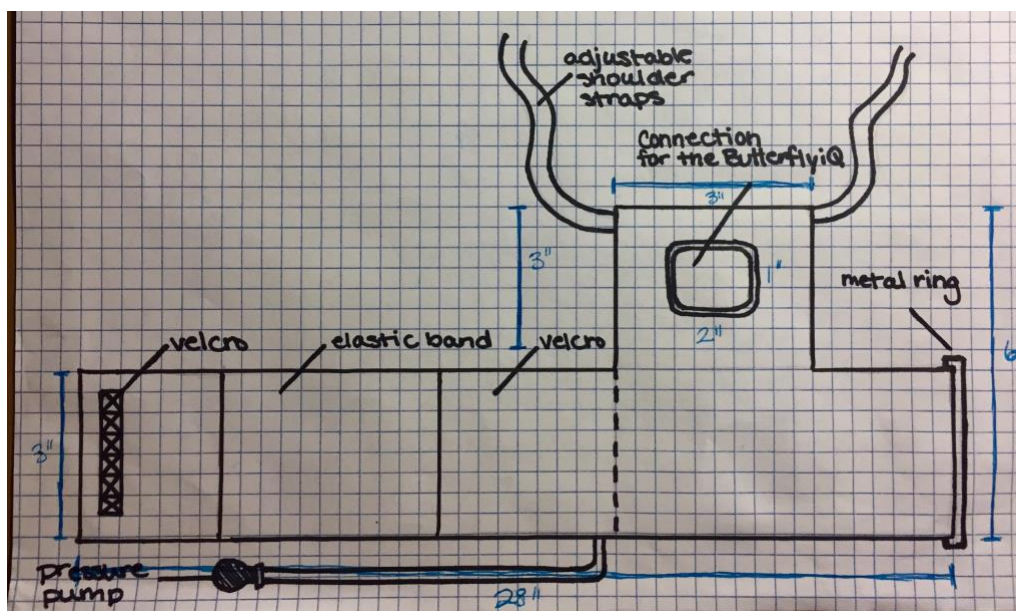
Prototype Presented in Design Freeze—Initial prototype had only one attachment ring
